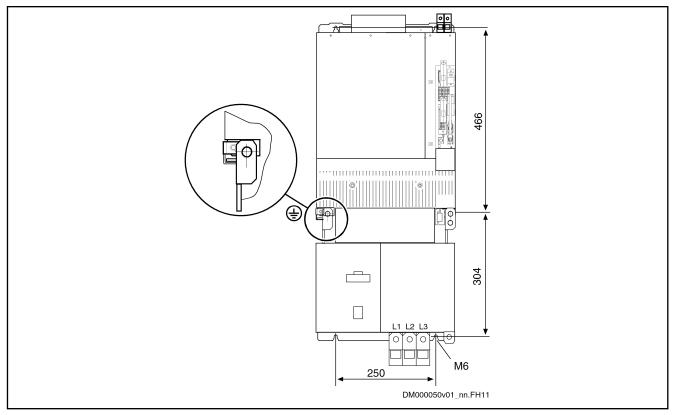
Arranging HCS03.1E-W0070 device and HNK01.1A-A075-E0050 mains filter
